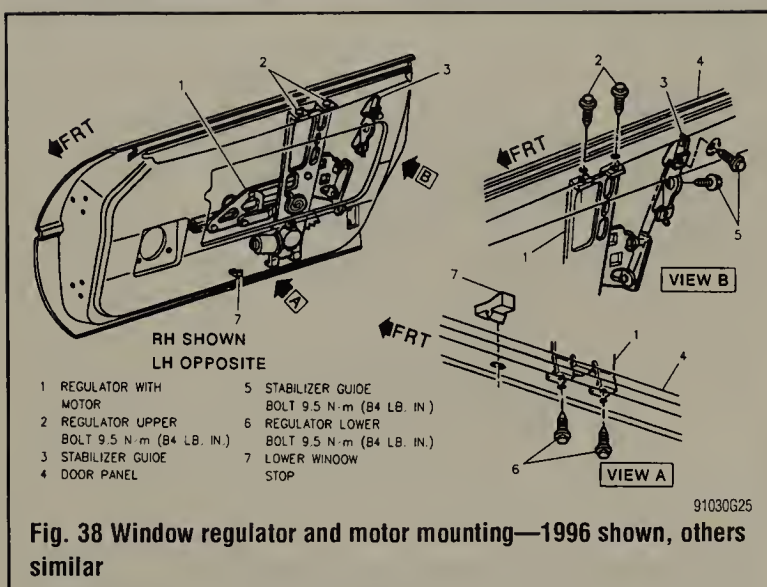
Window regulator and motor mounting—1996 shown, others similar
